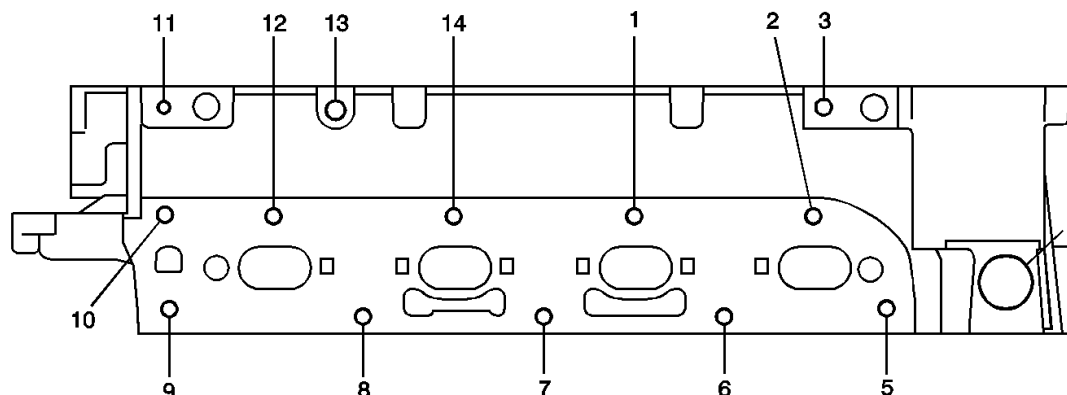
Cylinder Head - Exhaust Manifold Deck View
